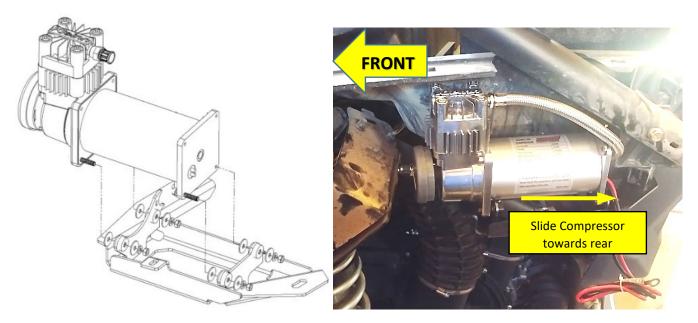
Air Compressor Temporary Install (Shown installed on CARB Vehicle)
